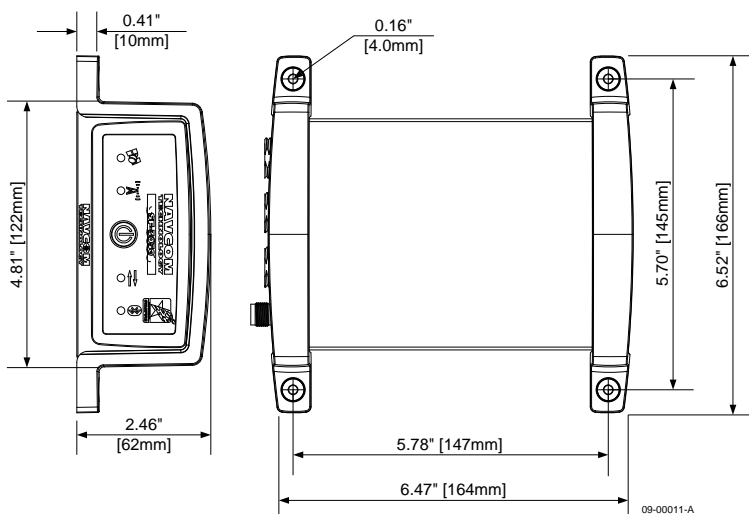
SF-3050 Base Plate Dimensions with Mounting Brackets
